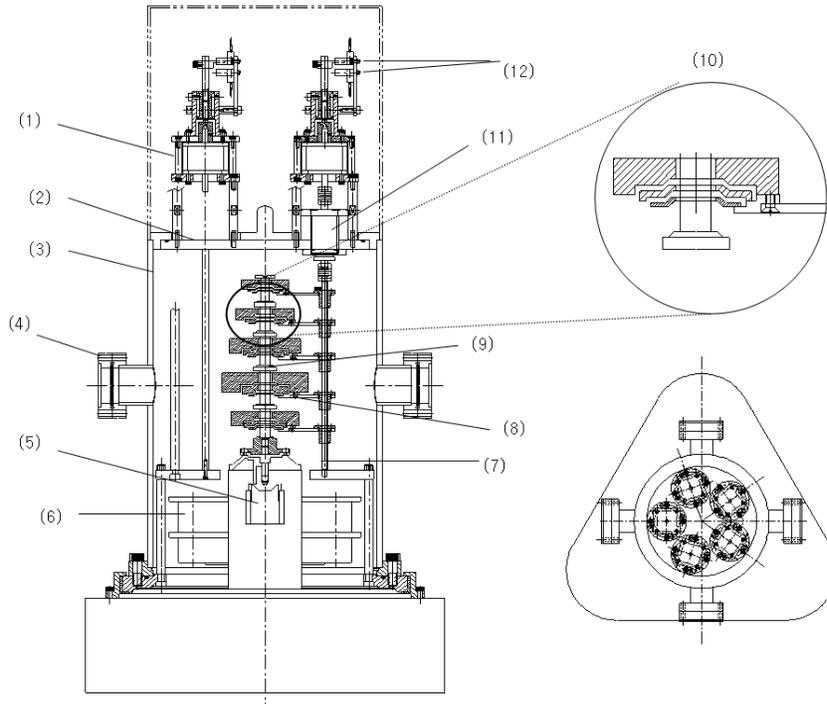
One of weight loading devices (1) stepping motor; (2) upper plate; (3) stainless steel chamber; (4) 2.75" port; (5) piston; (6) tare weights; (7) screw shaft; (8) weight lifter; (9) weight lifting shaft; (10) combined weight set; (11) rotary feed-through; (12) photo interrupter.
